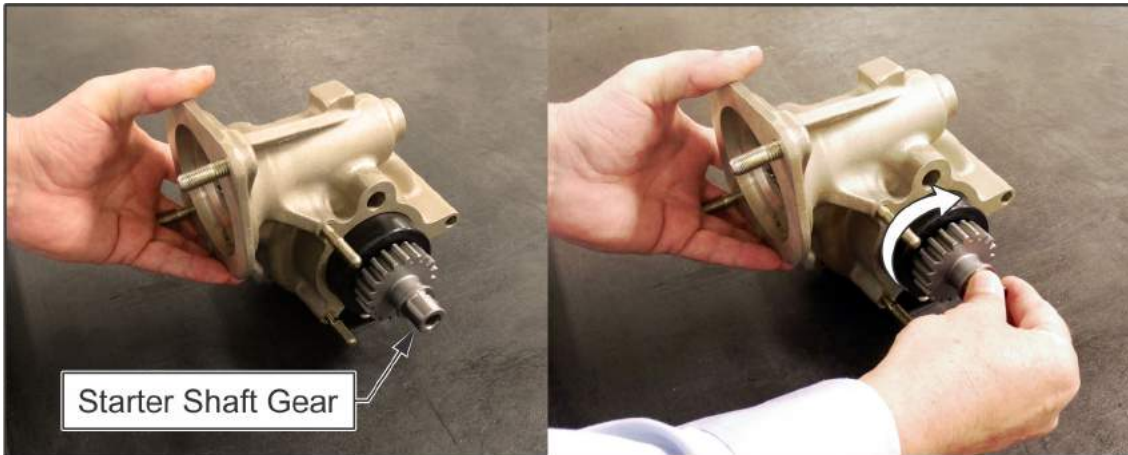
Rotate Starter Shaft Gear (in clockwise direction as shown)
